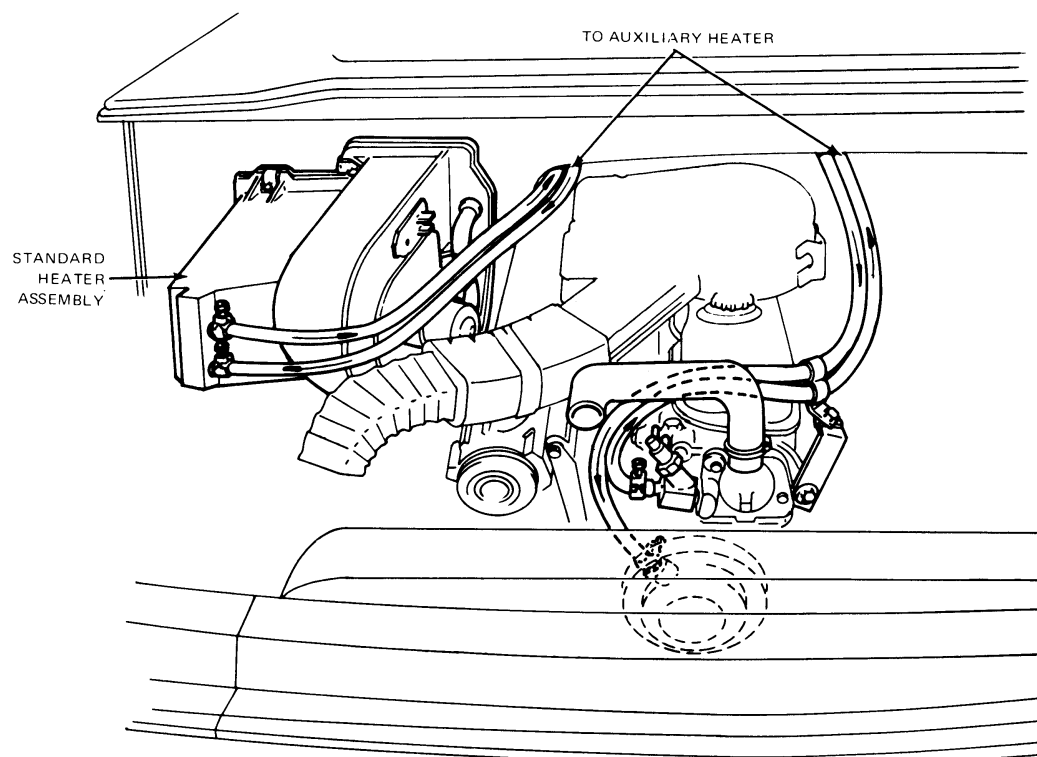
Auxiliary Heater Hose Routing—4.9L (300 CID) I-6 Engine
